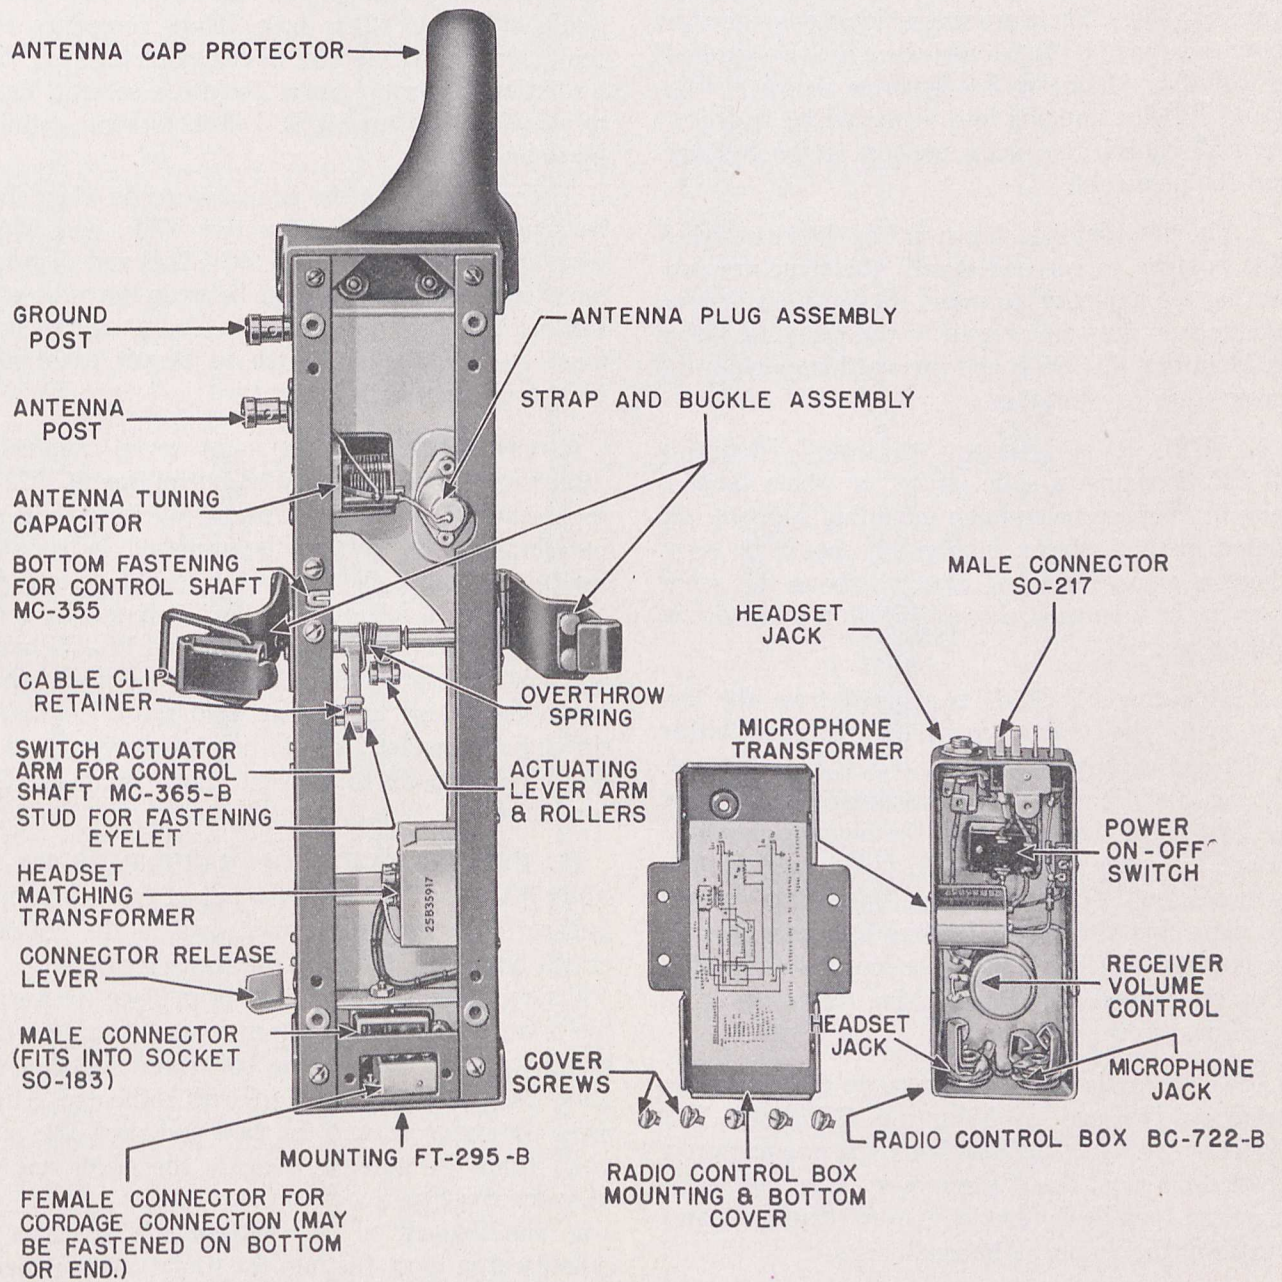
MOUNTING FT-295-B AND RADIO CONTROL BOX BC-722-B, (BOTTOM VIEW)
